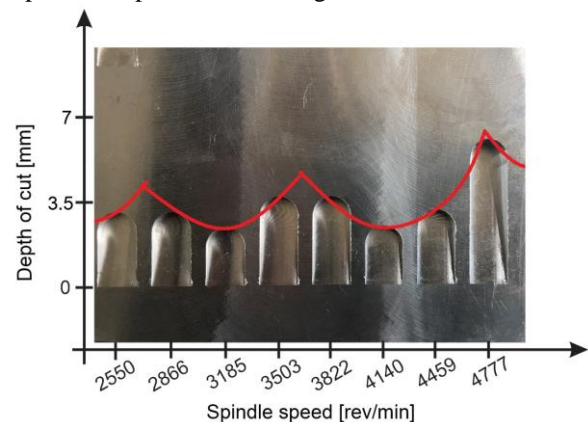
Expertly defined SLD of EMCO Concept Mill 450 machining center
